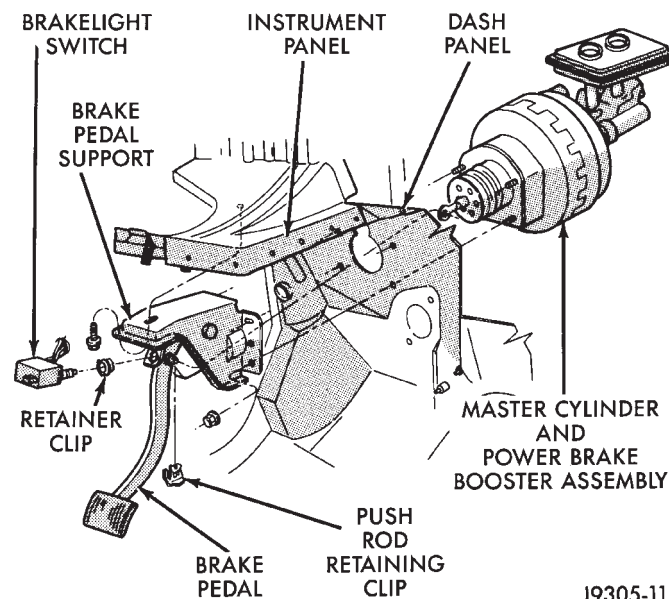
Brake Pedal And Brakelight Switch Mounting
